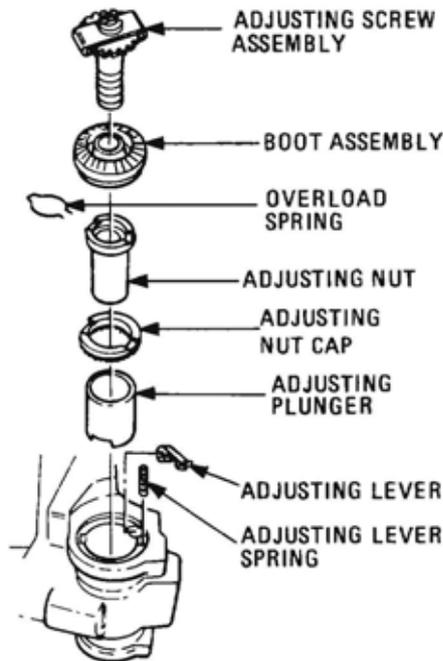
Exploded View of Adjusting Plunger (Front Brakes)
